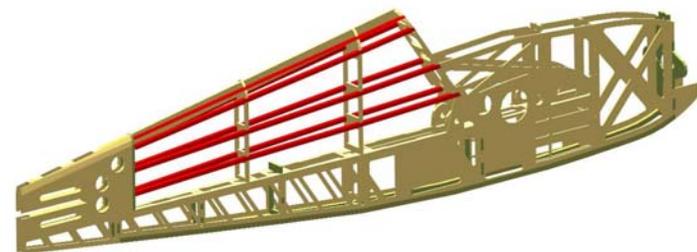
Cut to fit 6 3/32" and 2 3/32" x 1/16" square stringers. Glue in place.
